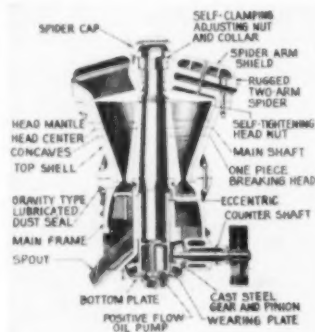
Sectional view of a typical "standard" gyratory crusher
